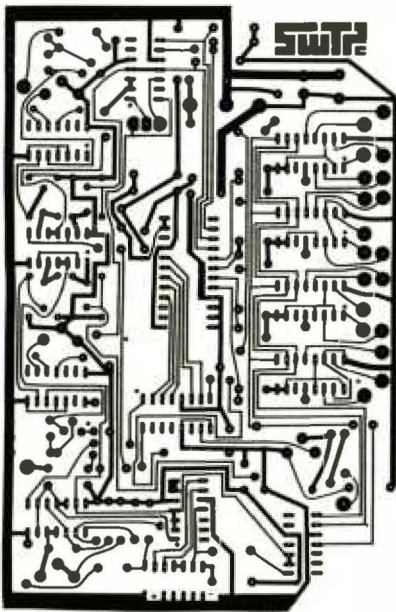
LAYOUT OF THE PRINTED CIRCUIT BOARD, one-half actual size.
